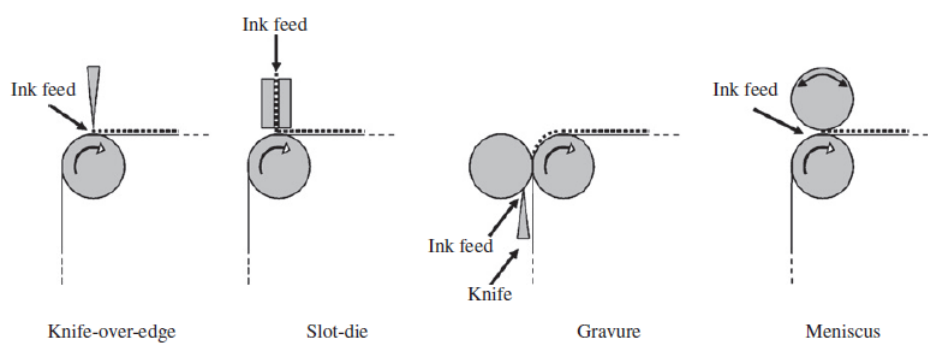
Roll-to-Roll Processing Fabrication Techniques [42]
